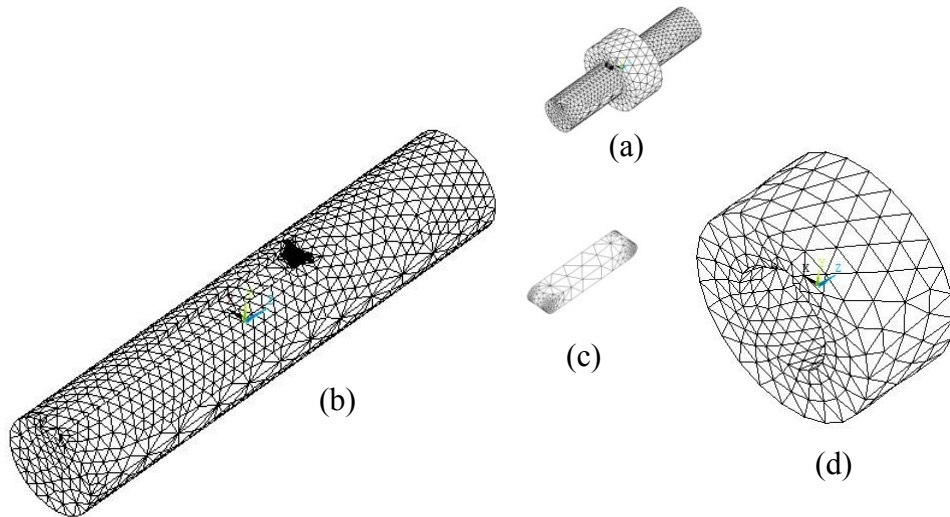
FEM model of bending model of hub, key and shaft with sled runner keyway, (a) Assembled parts, (b) Shaft, (c) Key, (d) Hub
